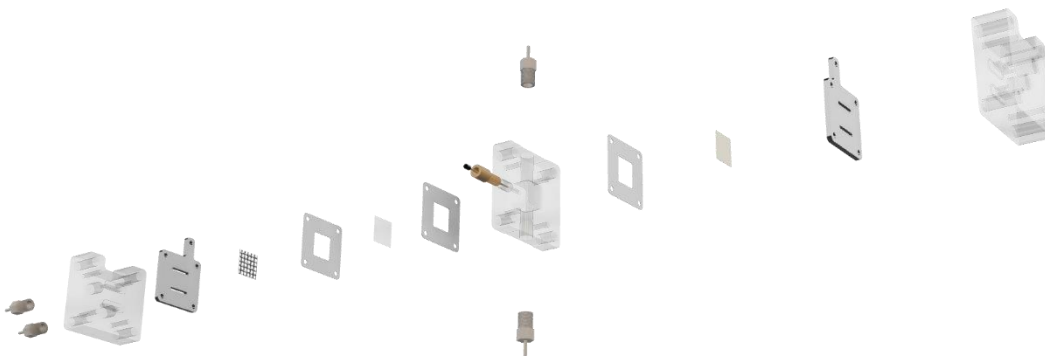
'Exploded' CAD view of cell and components.
